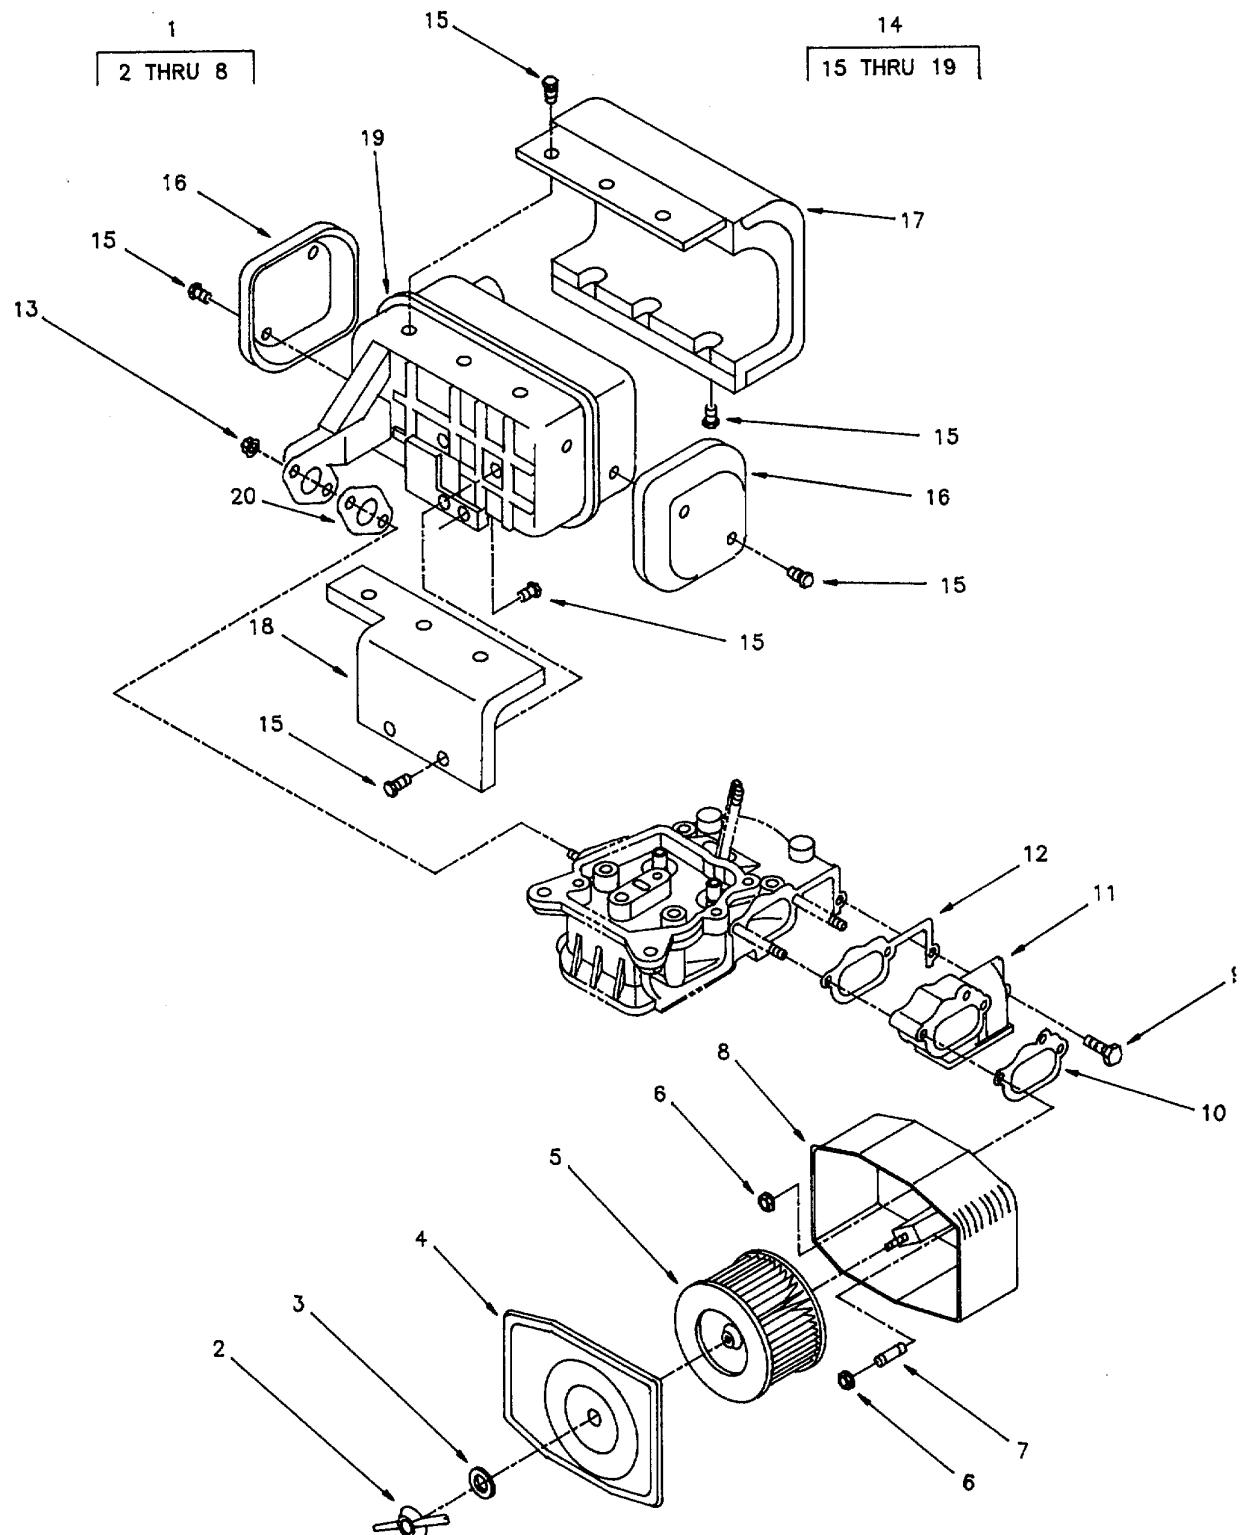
Intake Air Cleaner and Exhaust Muffler
